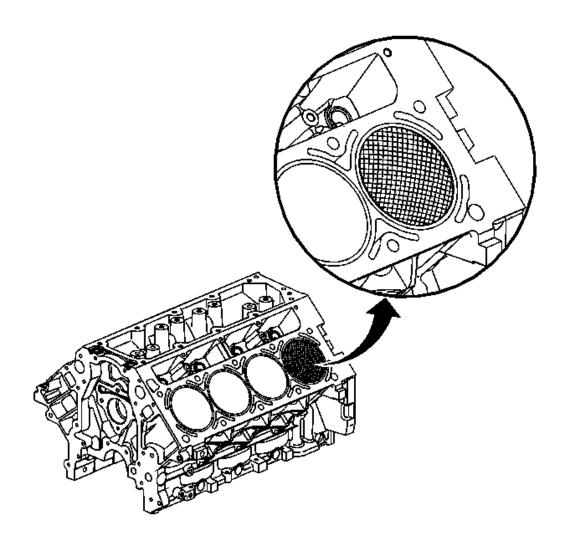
Illustrating Deglazing Cylinder Bore Courtesy of GENERAL MOTORS CORP.
